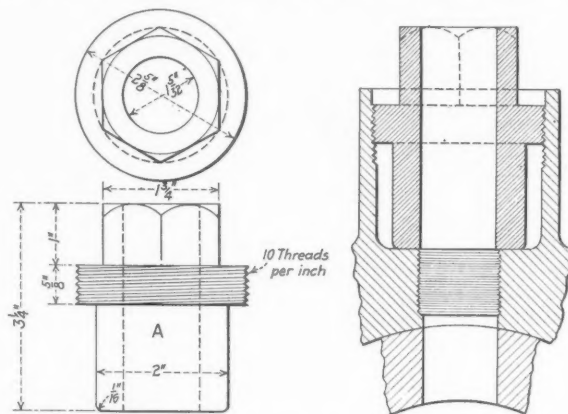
Jig Used in Drilling Rod Bushing Grease Plug Holes
